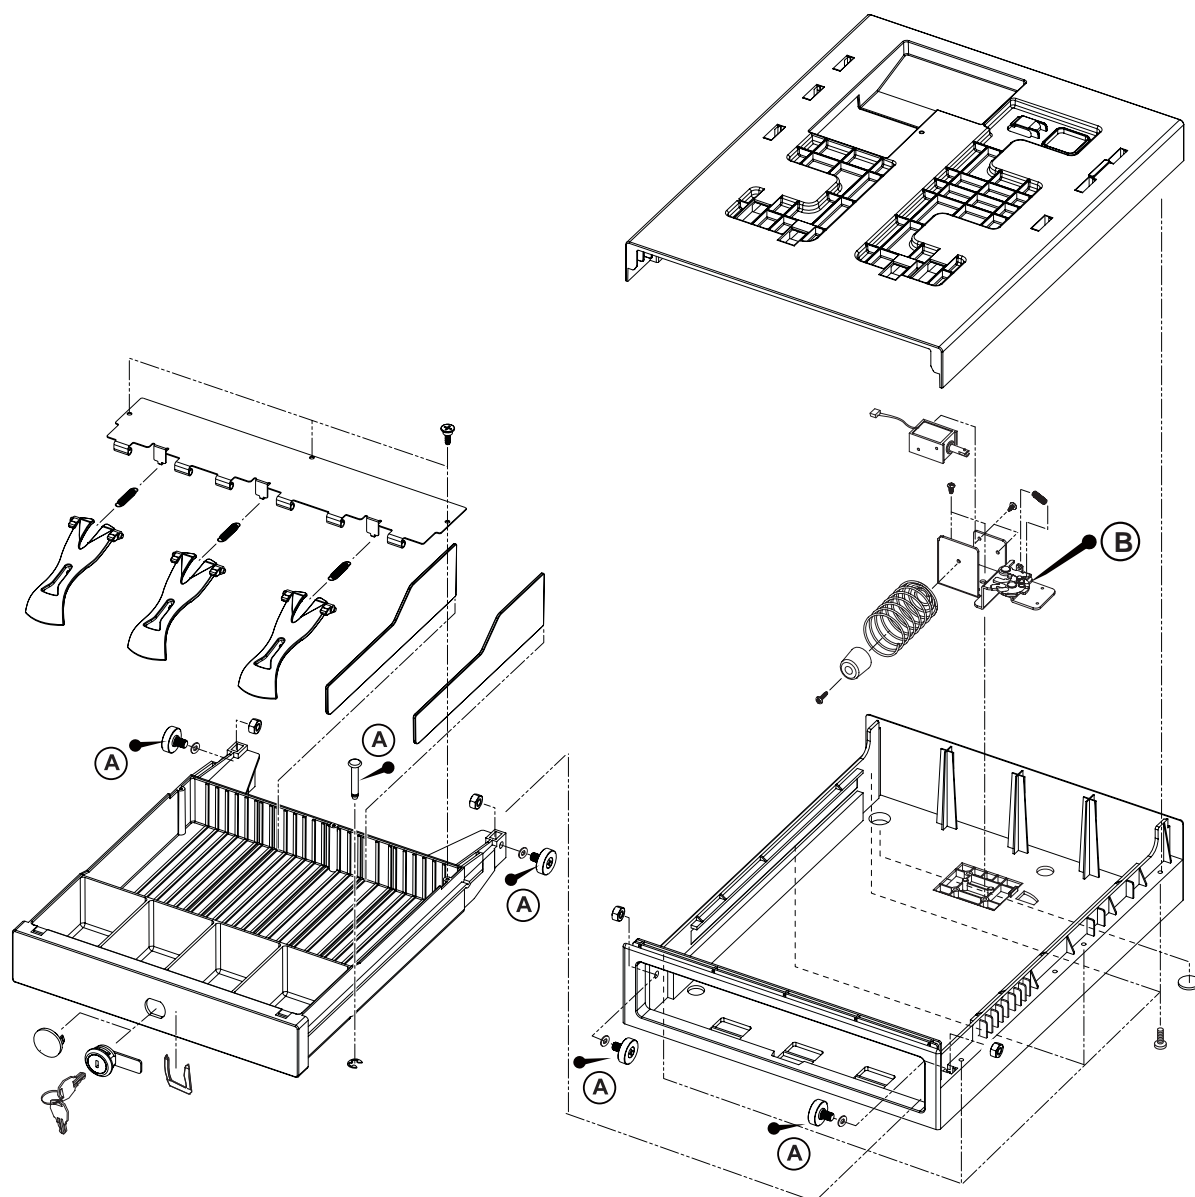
Lubrication Points of the B-TYPE Drawer (BOTTOM : STEEL LOCK)
